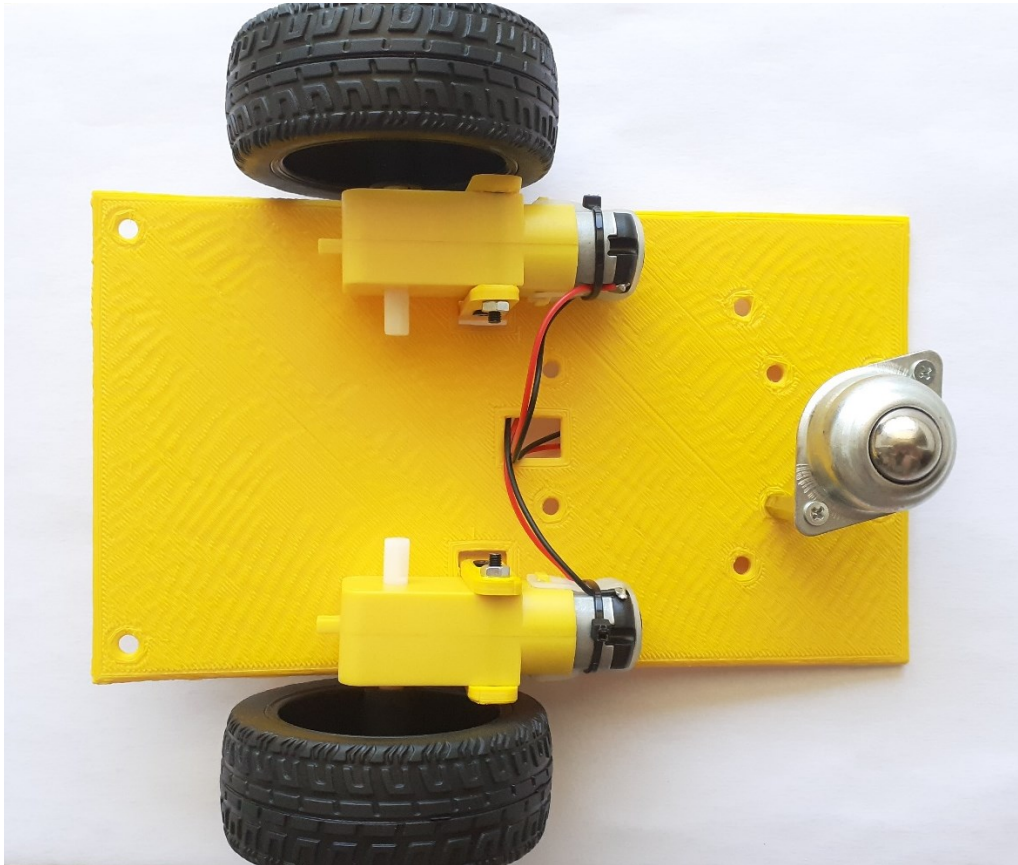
The DIY robotic car after placing the last part at the bottom side of the chassis
